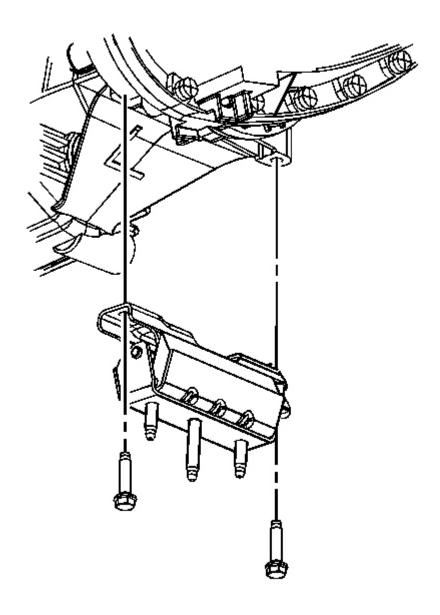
View Of Transmission Mount Courtesy of GENERAL MOTORS CORP.
